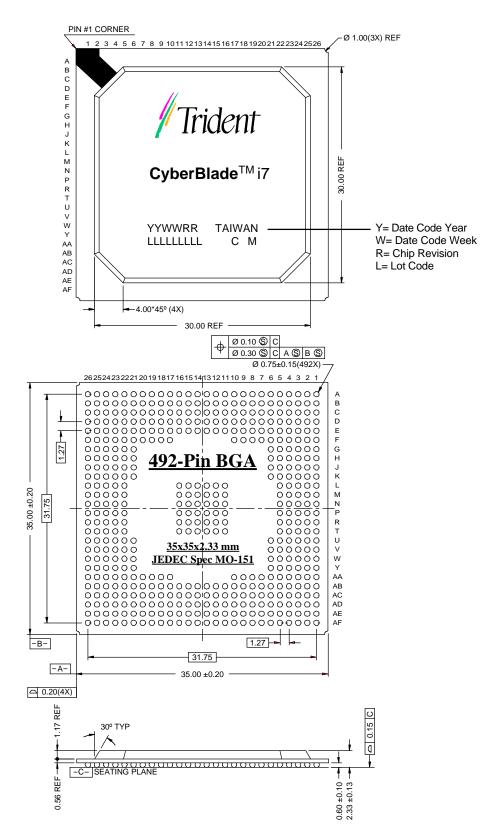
Mechanical Specifications - 492-Pin Ball Grid Array Package
